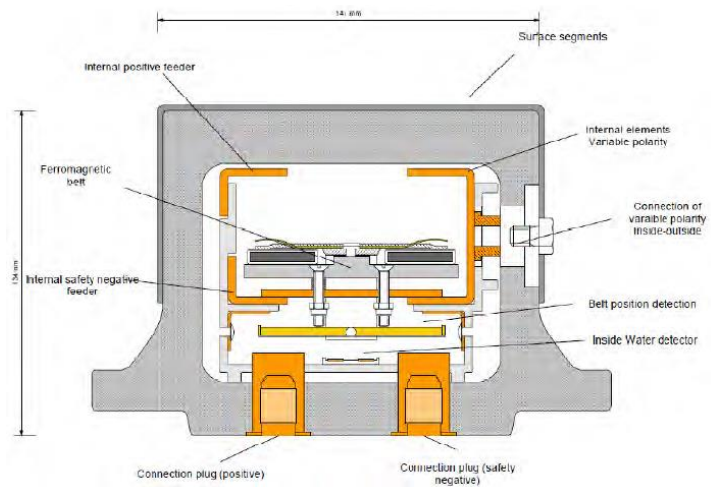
Ansaldo STS TramWave – Power Rail Cross Section
